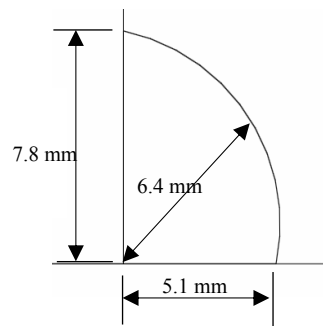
Case 5 weld dimensions used in finite element model for nominal fillet weld 6.4 mm.
